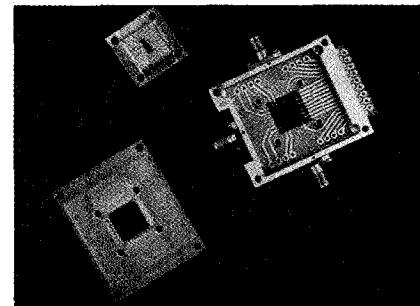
PHOTOGRAPH OF DEMOUNTABLE TEST FIXTURE FOR TESTING THE DOUBLE BALANCED MIXER
